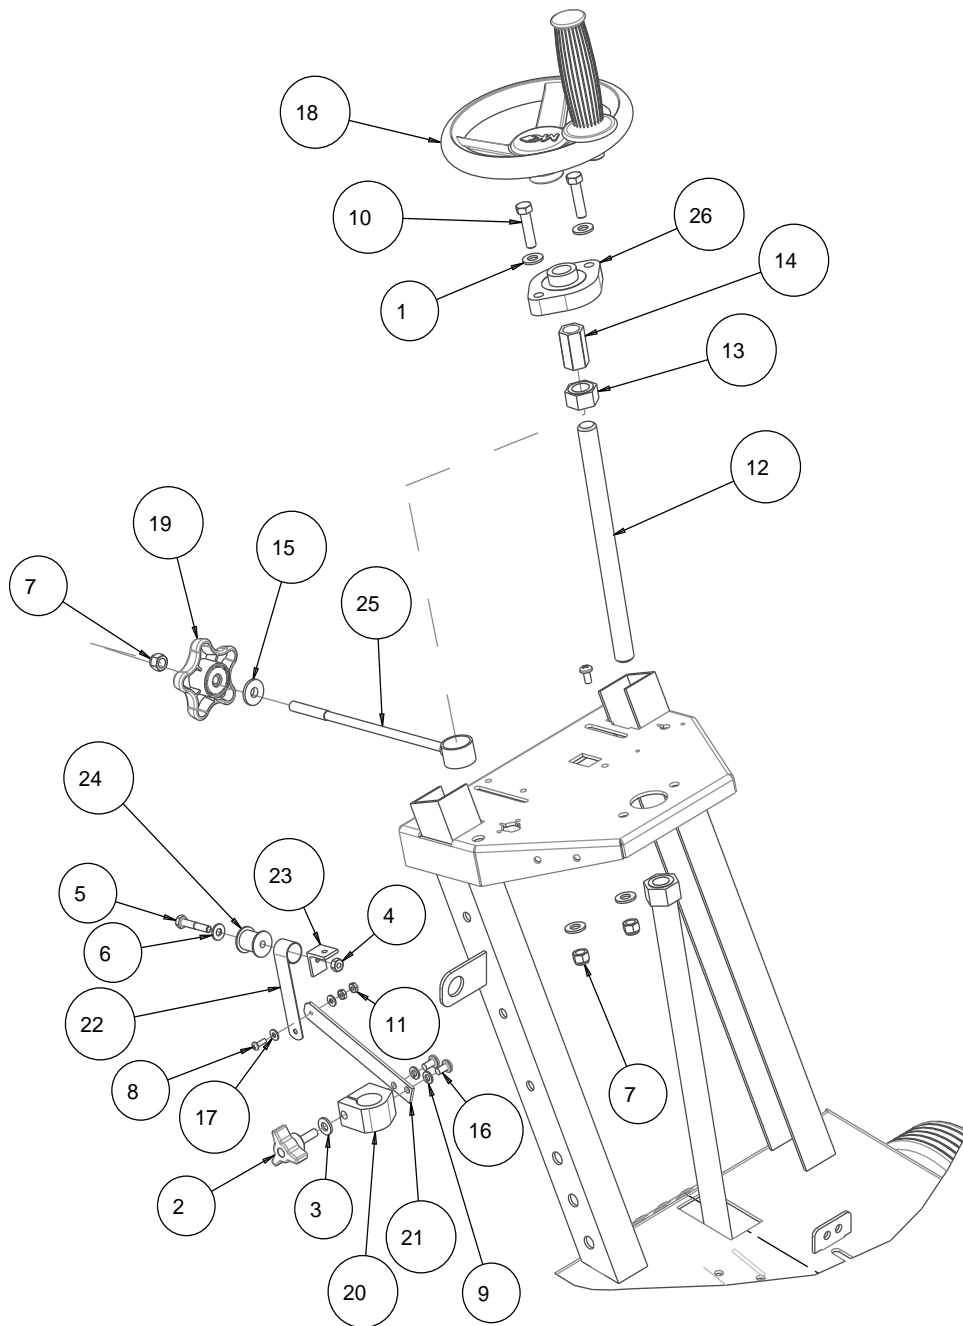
MK-1610 PREMIUM LESS MTR, 18" BG-SS P/N 172432
